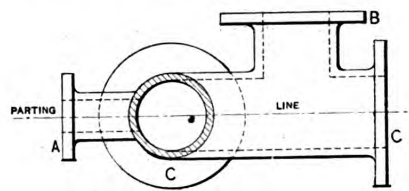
End View, with One Flange Removed; Also Showing Thickness of Metal.
